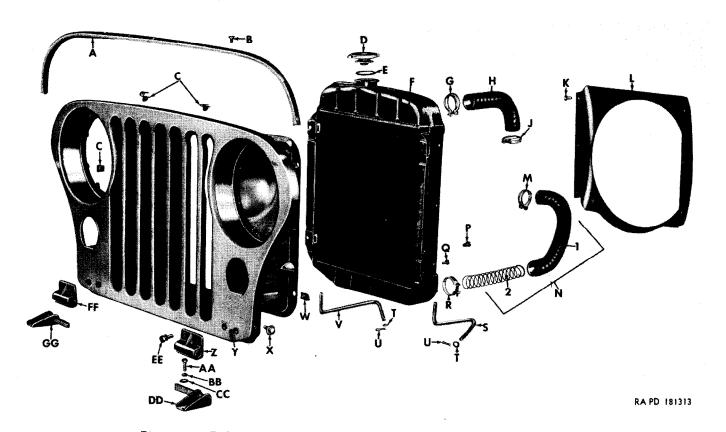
Radiator and radiator guard with hinges and hood liner-disassembled view.
